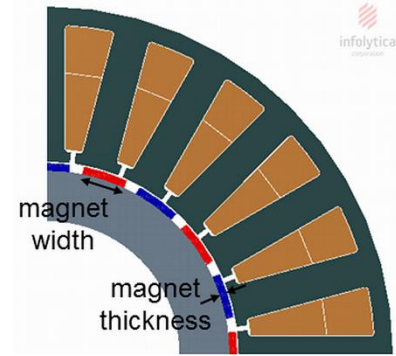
Quarter cross-section of surface mounted PMG with parallel magnets.
